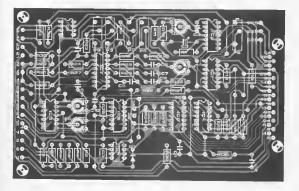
The printed circuit board and component layout for the VCO module. A minor printing error occurred on the component overlay. Connection 36 on the right-hand side should read 44.
